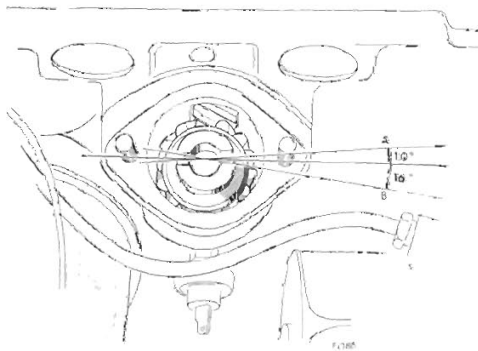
Position of slot in the distributor drive gear with No. 1 piston at T.D.C. on the compression stroke
